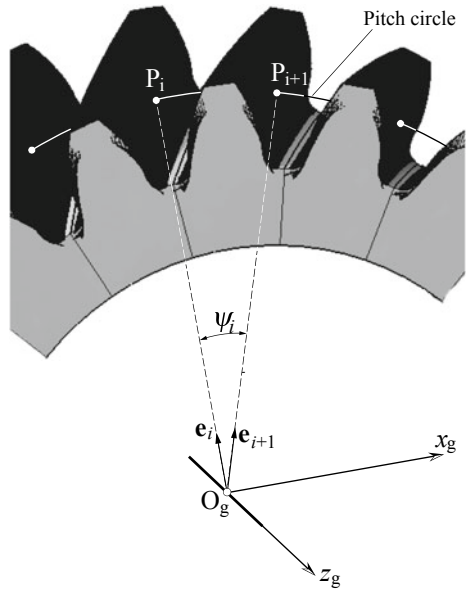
Point clouds for each tooth and gear model obtained from the regenerated gear tooth surfaces
